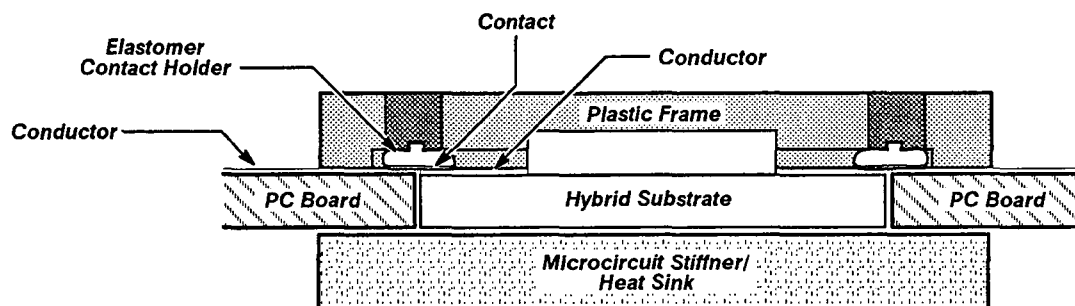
Removing/Replacing a Hypcon Assembly
